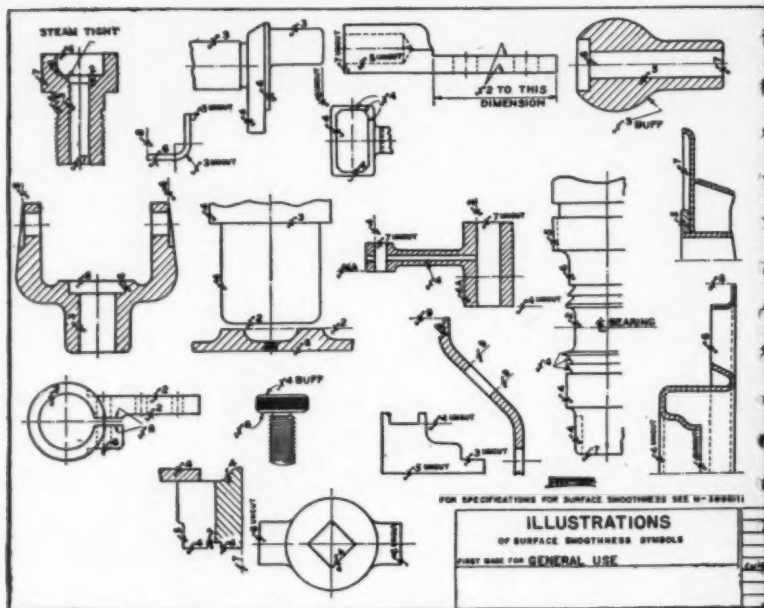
Method of designating surface finish on a drawing. The proper "f" symbols are applied to the surfaces to be machined.
